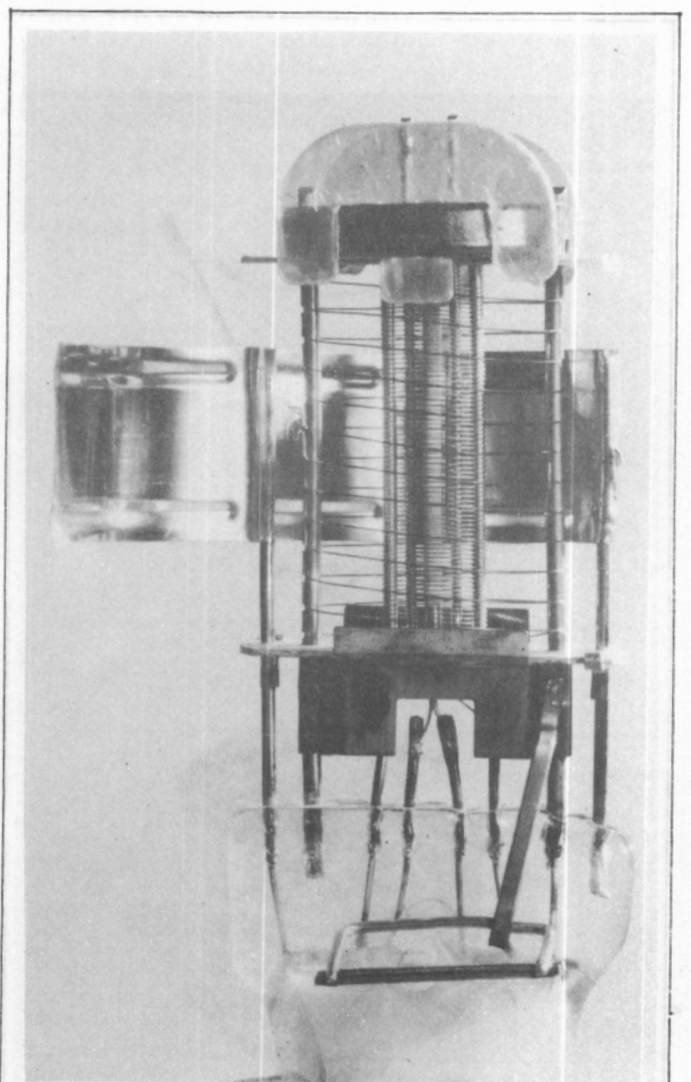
Radio valve showing glass to metal seals and cathode, grid and anode assemblies with support wires.
